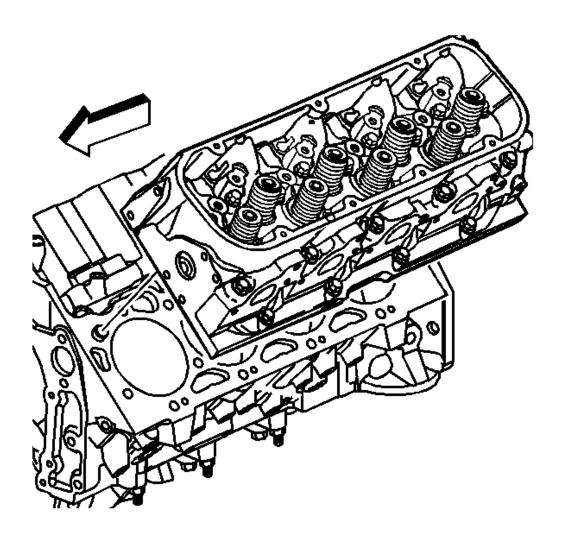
View Of Left Cylinder Head And Alignment Pin Courtesy of GENERAL MOTORS CORP.
